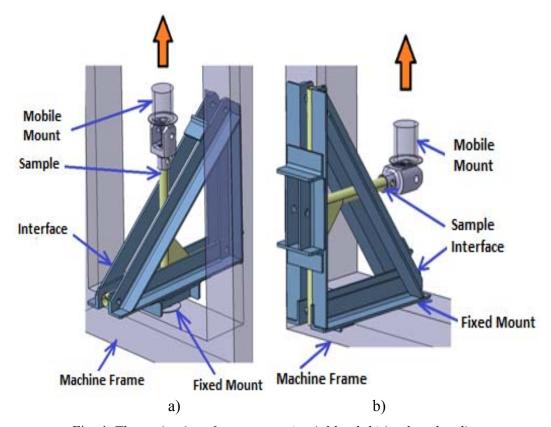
The testing interface mount: a) axial load; b) in plane bending
